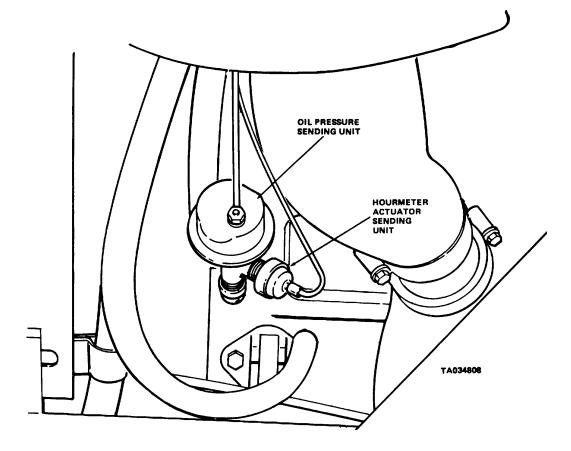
Oil pressure and hourmeter actuator sending units, installed view.
